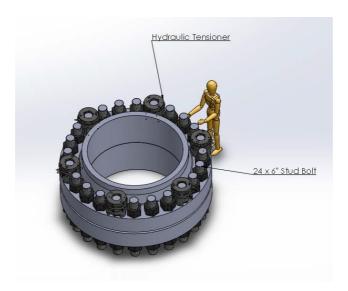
24 bolts simple case WELD NECK FLANGE 60" 900 lbs (horizontal position)
